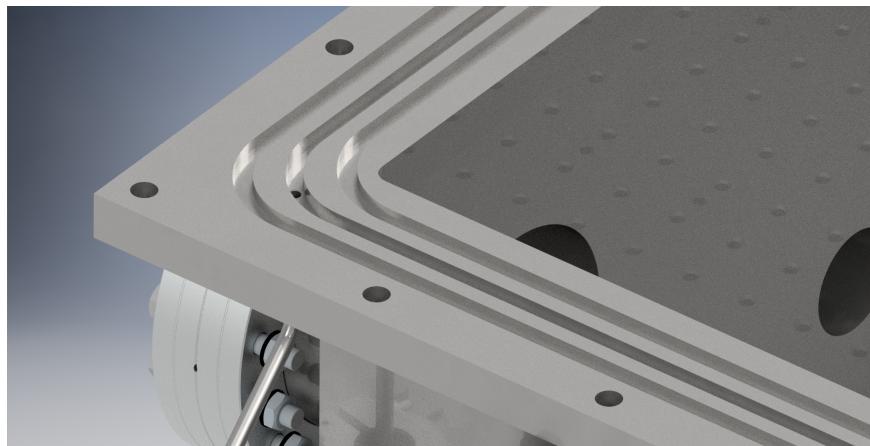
Rendering of the mirror chamber's sealing surface showing detail of the differentially pumped double o-ring. O-rings are not shown in this figure. The two o-ring glands, the central pumping channel and the welded 1/4" stainless steel pumping tube are visible. Four through holes for the 5/16" sealing bolts are visible at the perimeter of the chamber's sealing surface.
